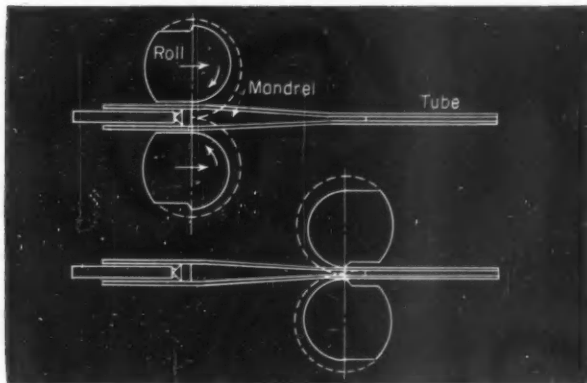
Tube mill uses shaped dies and mandrel to cold-reduce tubing.
